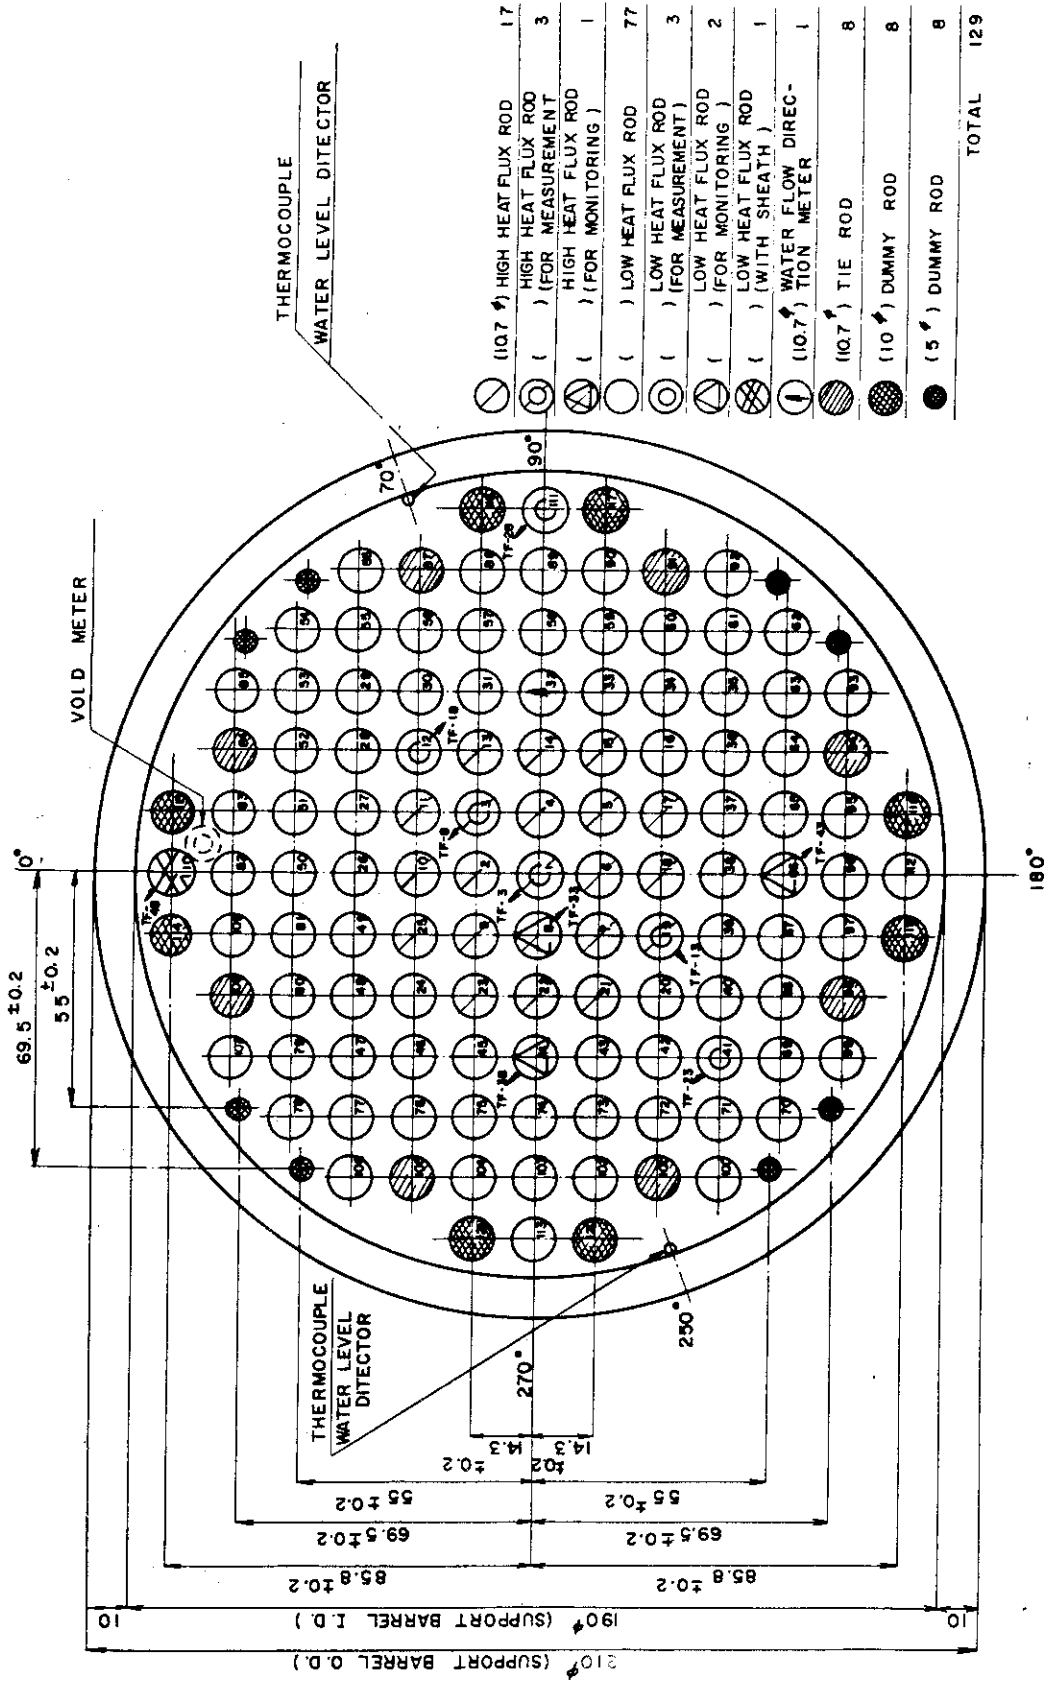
Arrangement of Simulated Fuel Rods in No.4 Assembly
